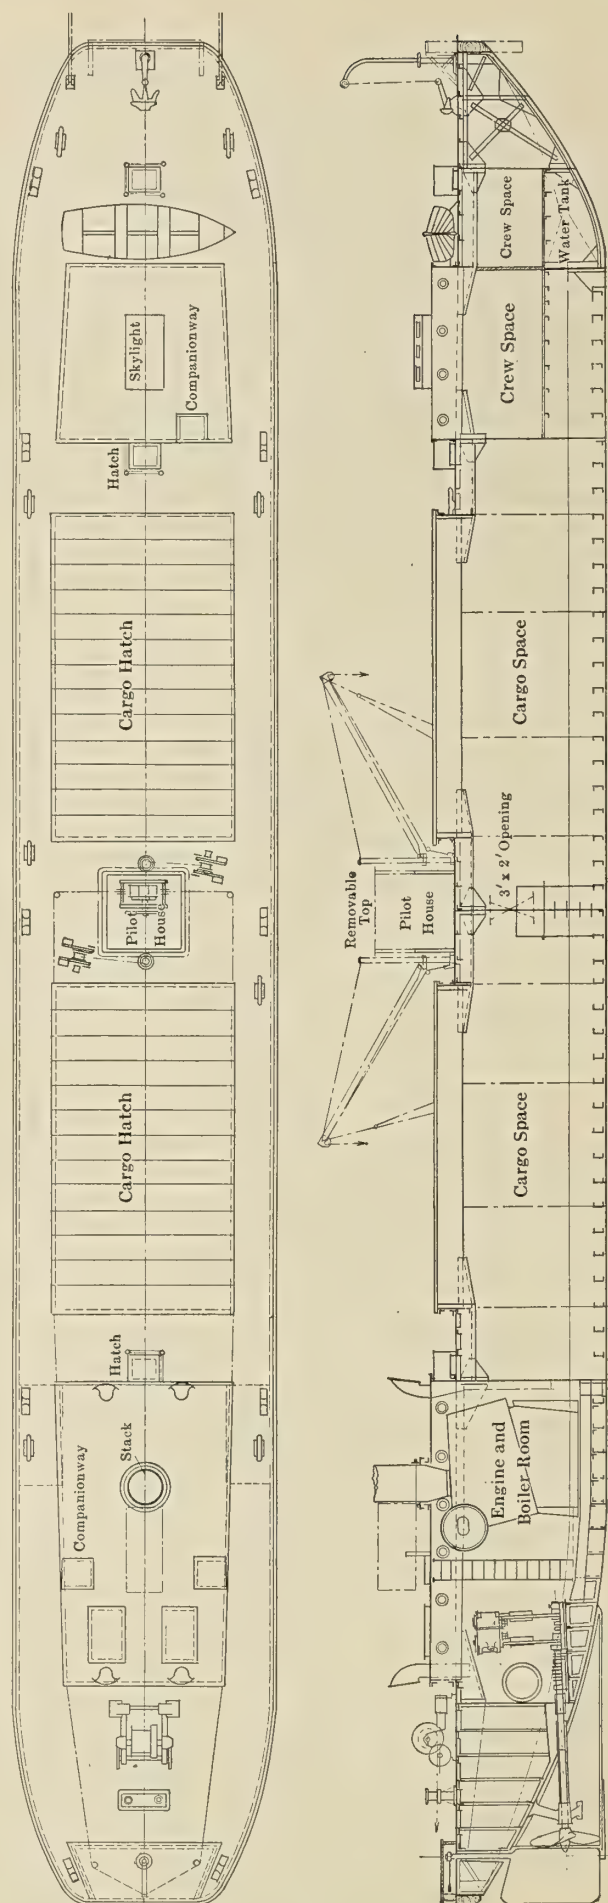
General Arrangement Plans of Self-Propelled Steel Barge for New York Barge Canal
